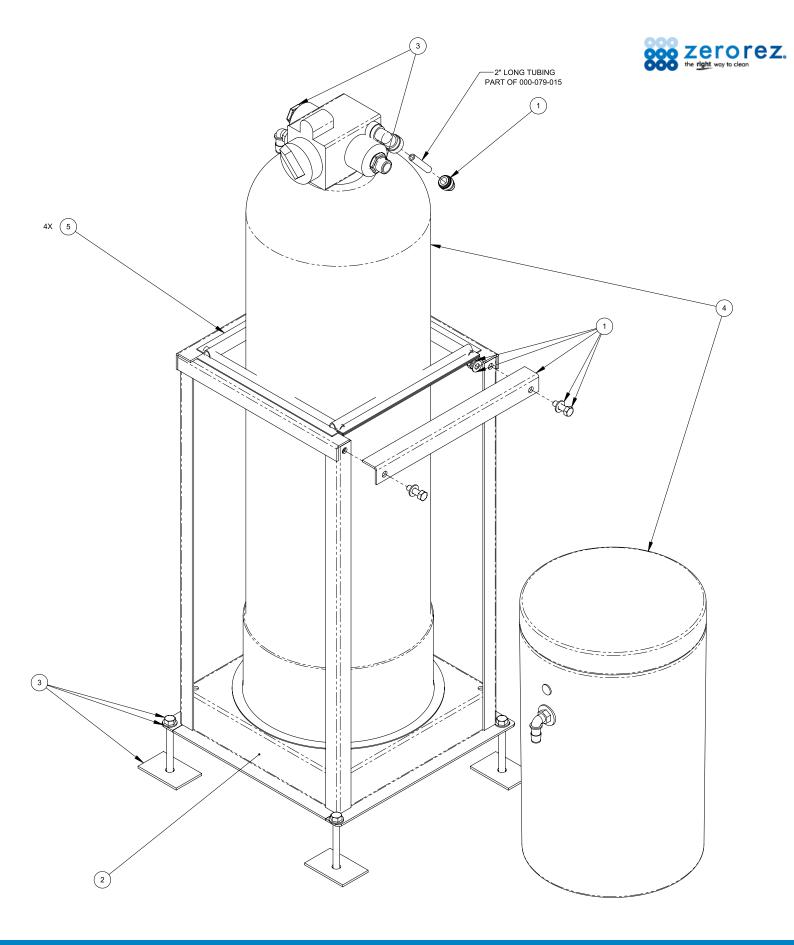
32K Water Softener Brine Tank Assembly 000-163-615 Rev. B
